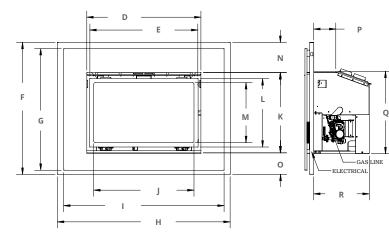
Unit dimensions (Tolerance ± 1/8") [1.25 mm]
